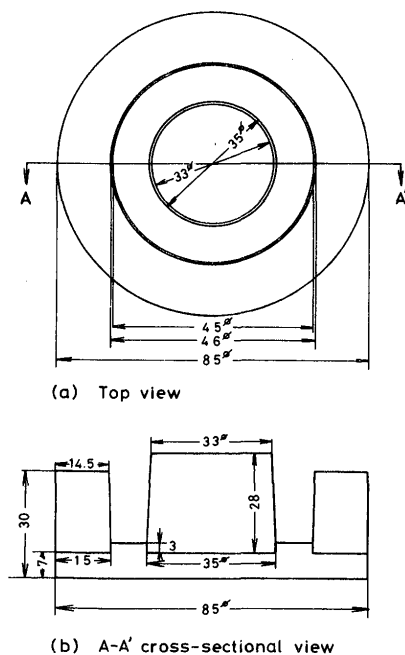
Shape and dimension of mold for ring casting cracking test
